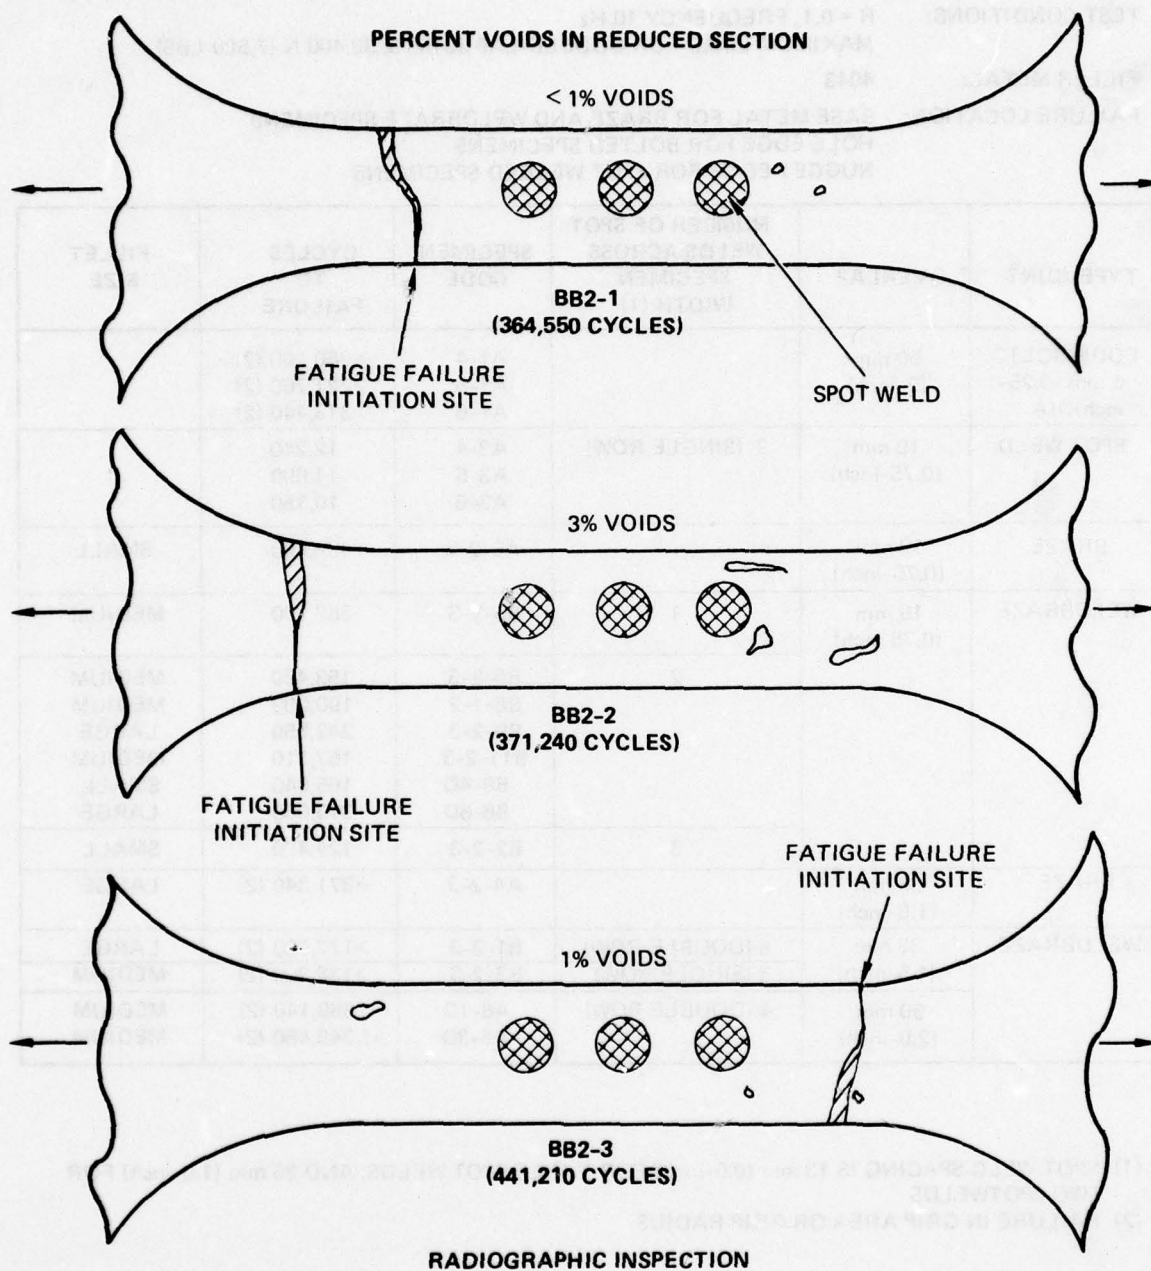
FILLER-METAL VOIDS AND FAILURE LOCATION FOR LOW LOAD TRANSFER Ti-6Al-4V WELDBRAZE JOINTS
